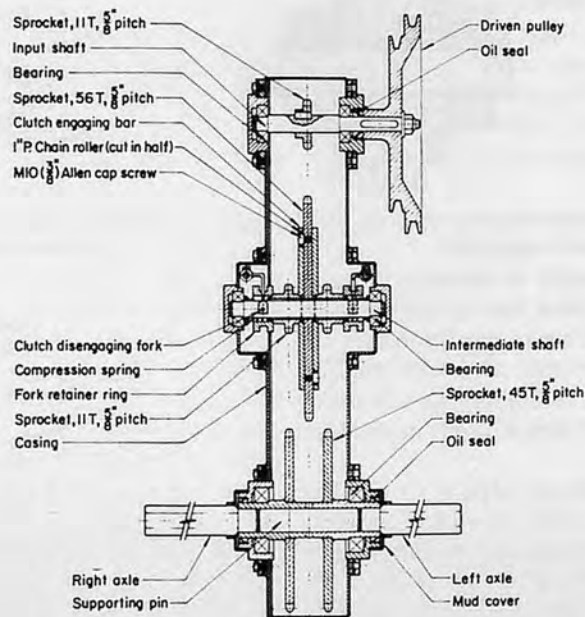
Cross-sectional view of IRRI 6-8 hp Power Tiller with steering clutches.
